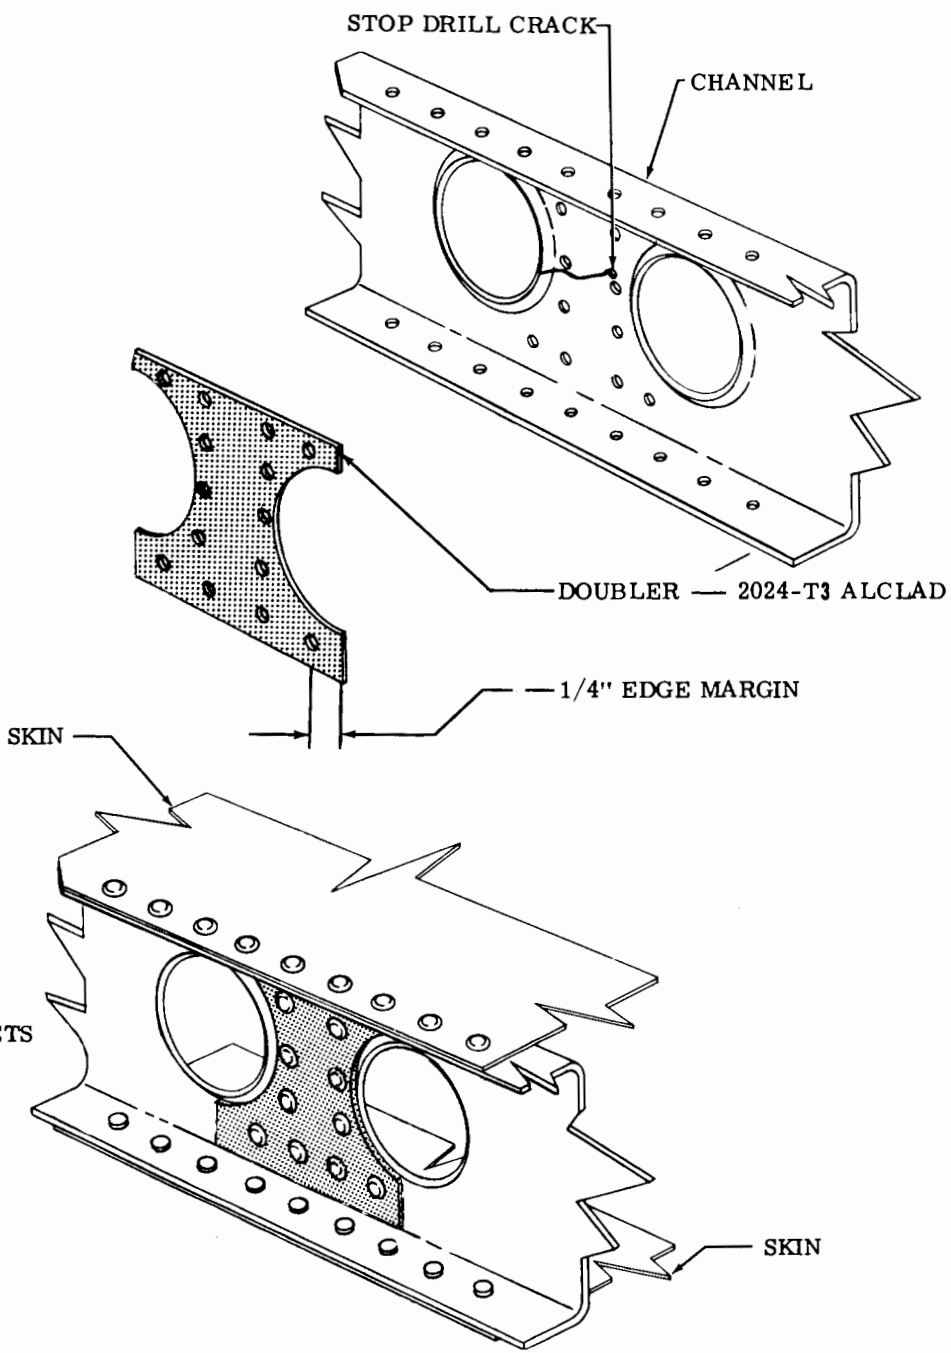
Stringer and Channel Repair (Sheet 3 of 4)
